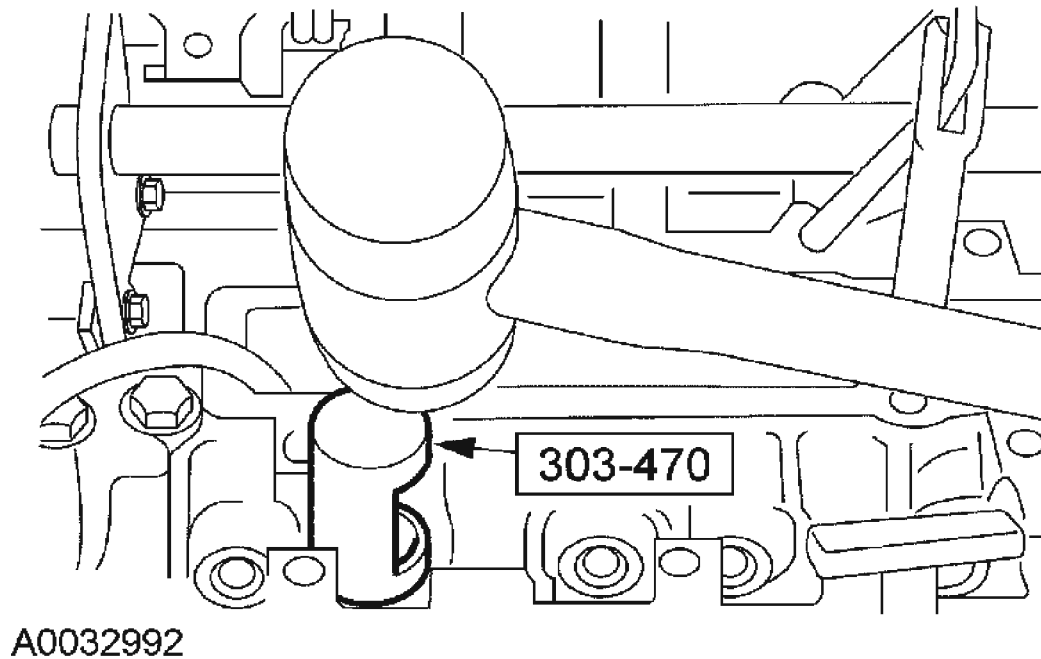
Using Special Tool To Install Valve Stem Oil Seals
